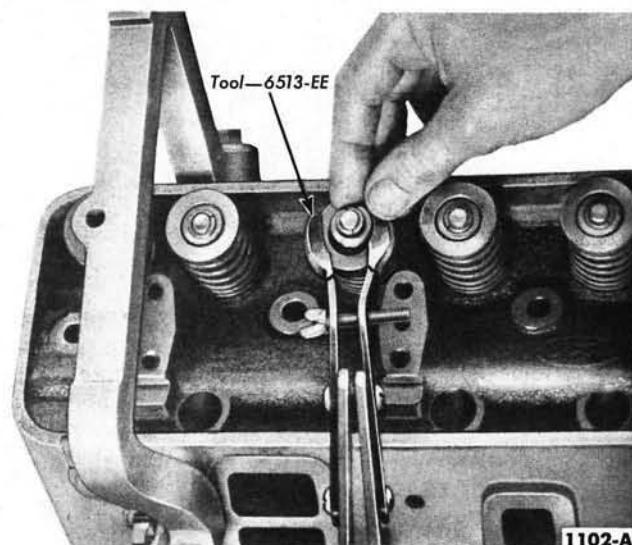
Valve Spring Retainer Locks—Removal or Installation
